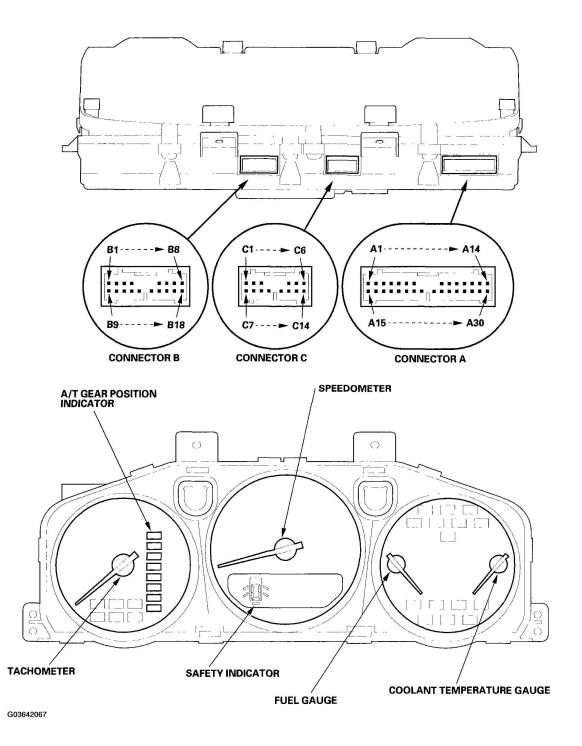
Identifying Gauge Components Location ('03 Model) Courtesy of AMERICAN HONDA MOTOR CO., INC.
